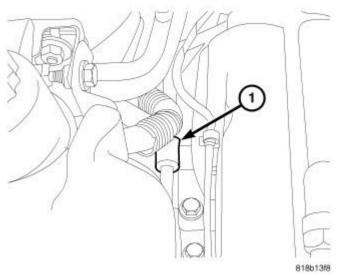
Oil Cooler Adapter, Oil Cooler & Oil Filter Courtesy of CHRYSLER GROUP, LLC
